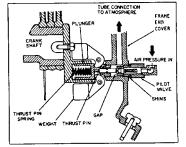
Position of weight and thrust pin when compressor is stopped.
